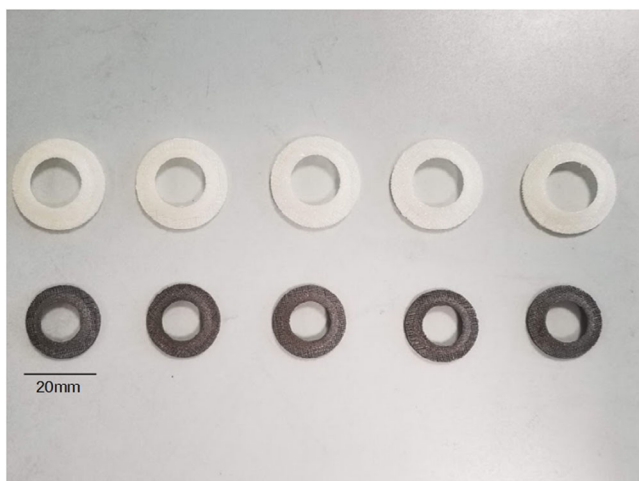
Ring-shaped spacer parts to test the fitting tolerances.
